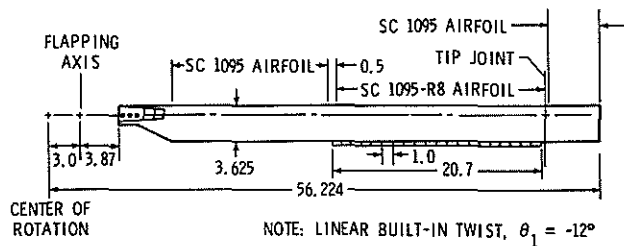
Rotor blade geometry. Blade dimensions are in inches.
